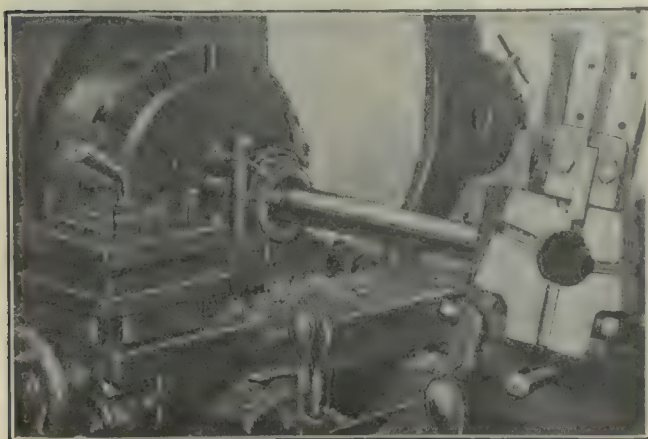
BORING BEARINGS ON A TURRET LATHE
